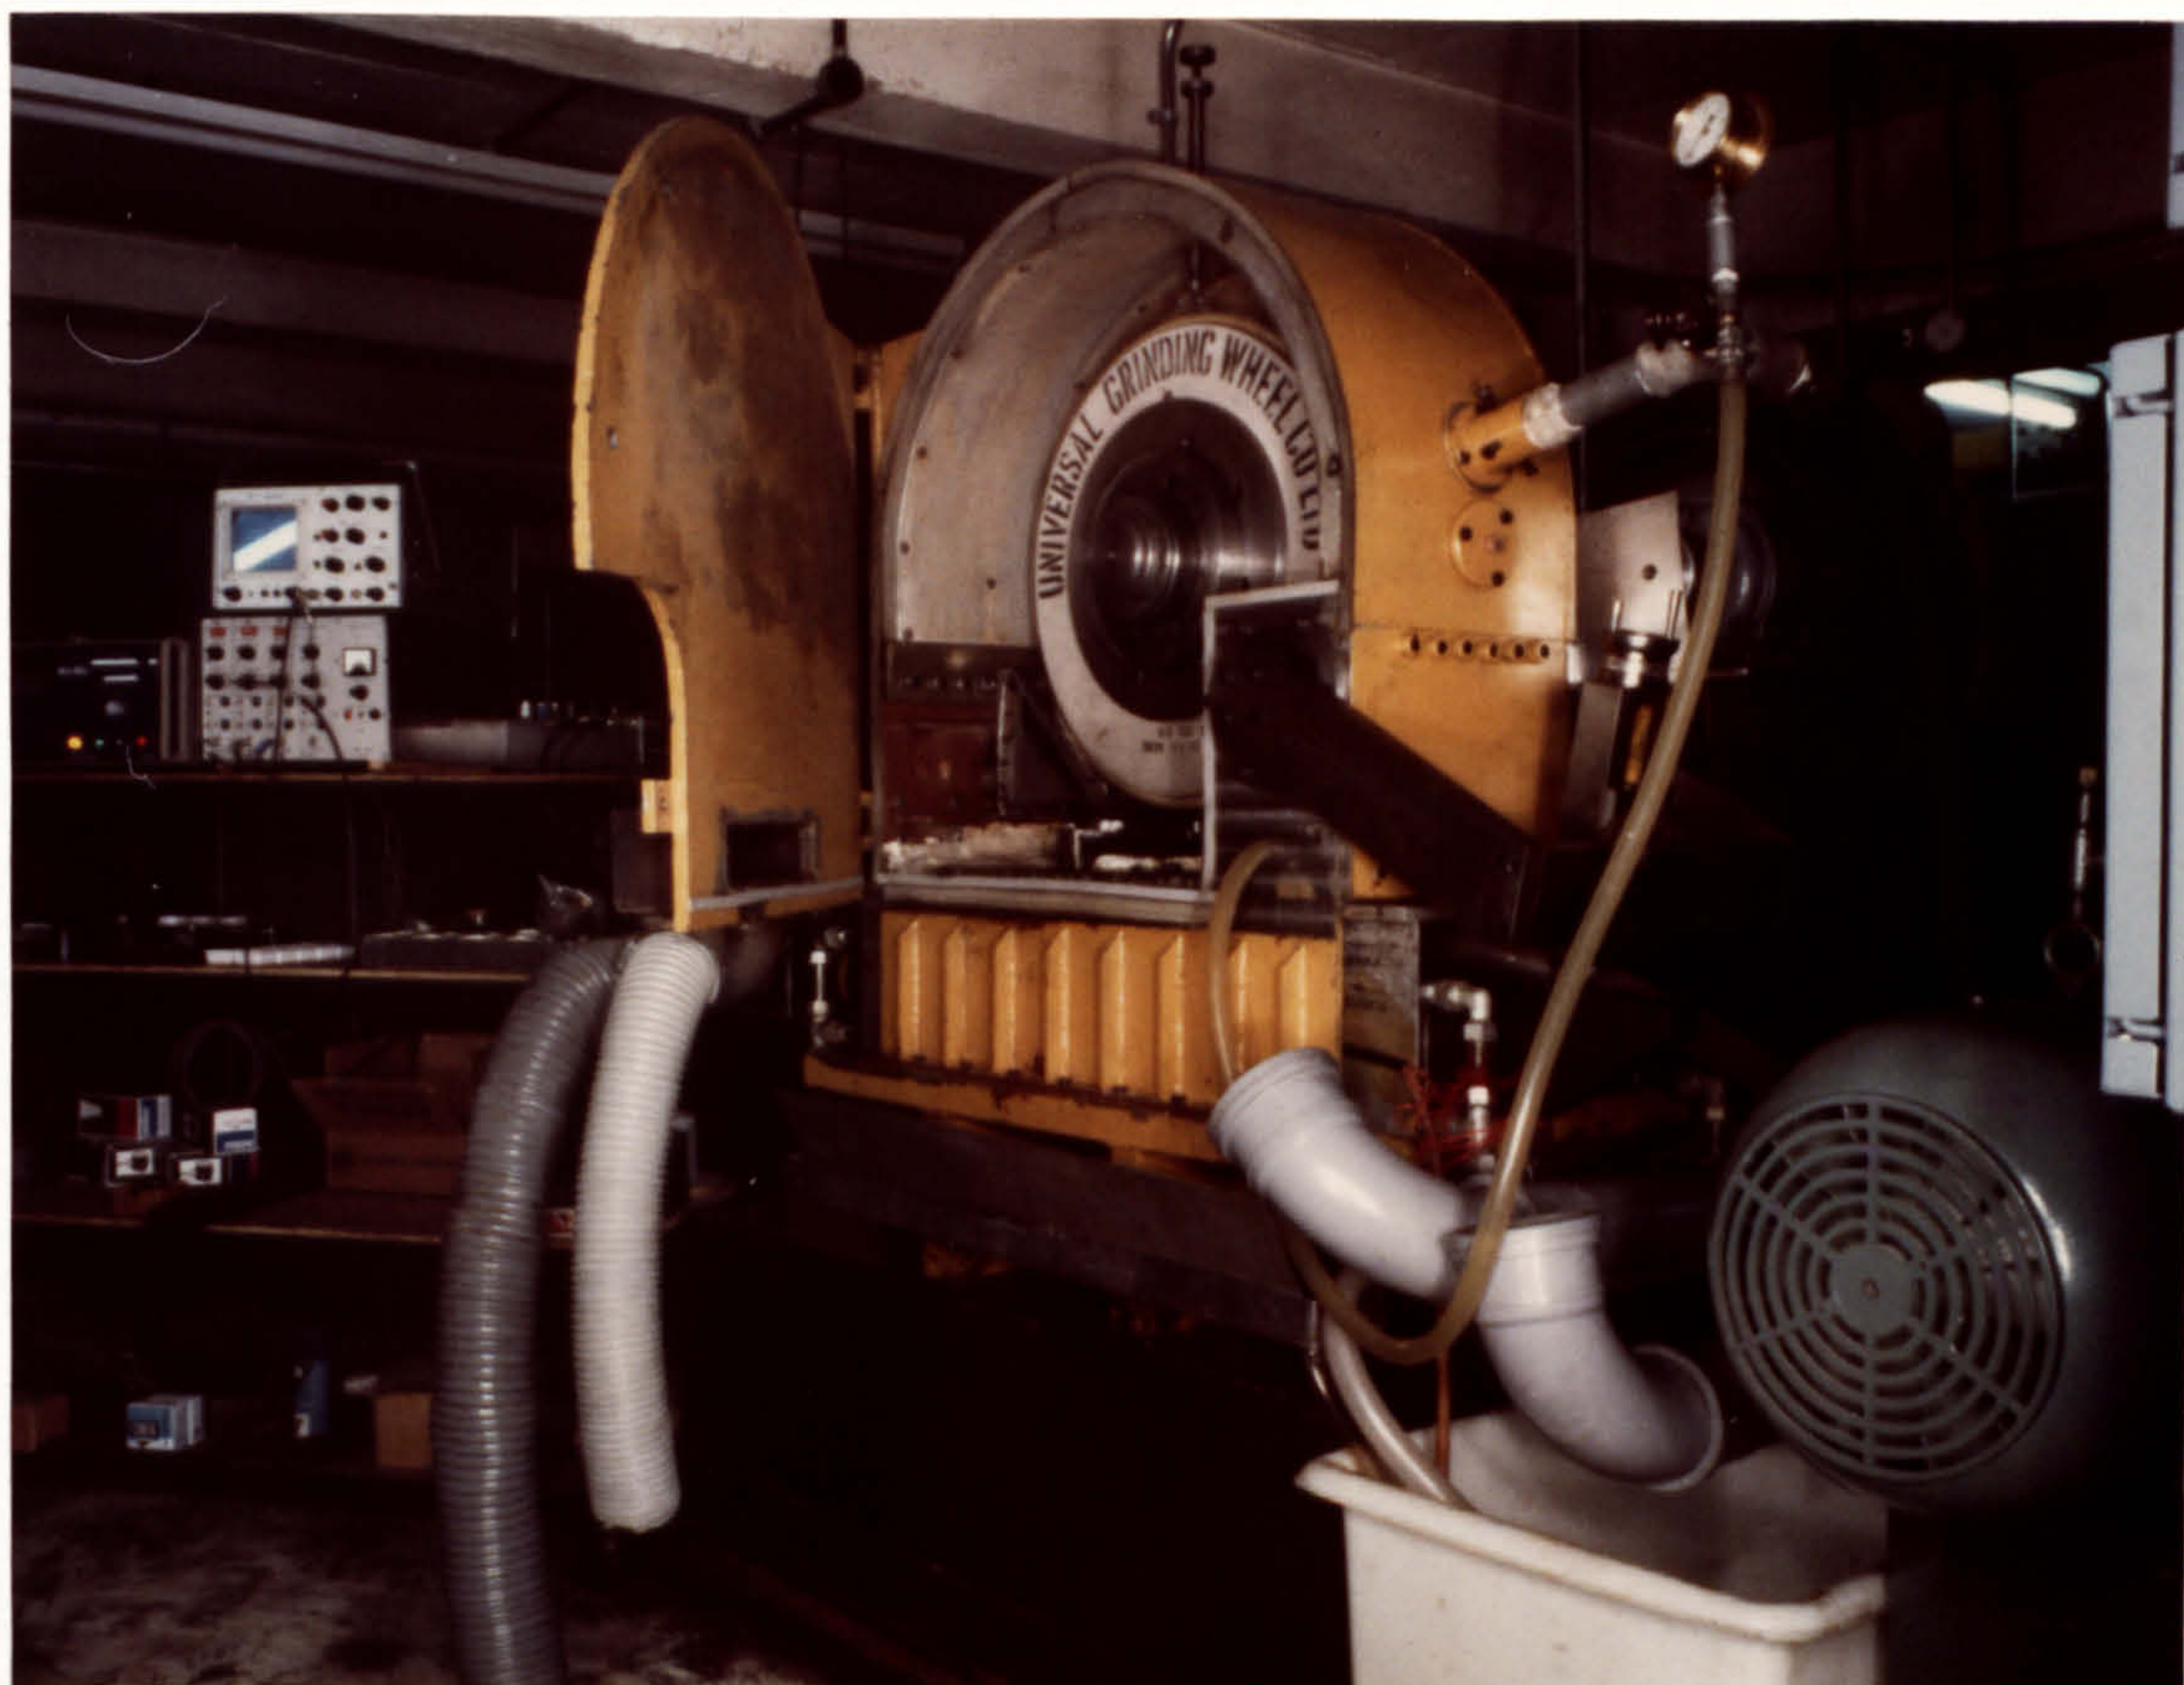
This photograph shows a general view of the High-Speed Creep-Feed Grinding Research Rig. Particular points to note are the diamond roller dresser in-feed mechanism to the right of the rig, the cutting fluid shoe on the left of the grinding wheel and the attention to safety shown by the steel plating and energy absorbent layer surrounding the grinding wheel in order to contain a wheel burst. The instrumentation and data recording system is situated on the trolley to the left of the rig.
